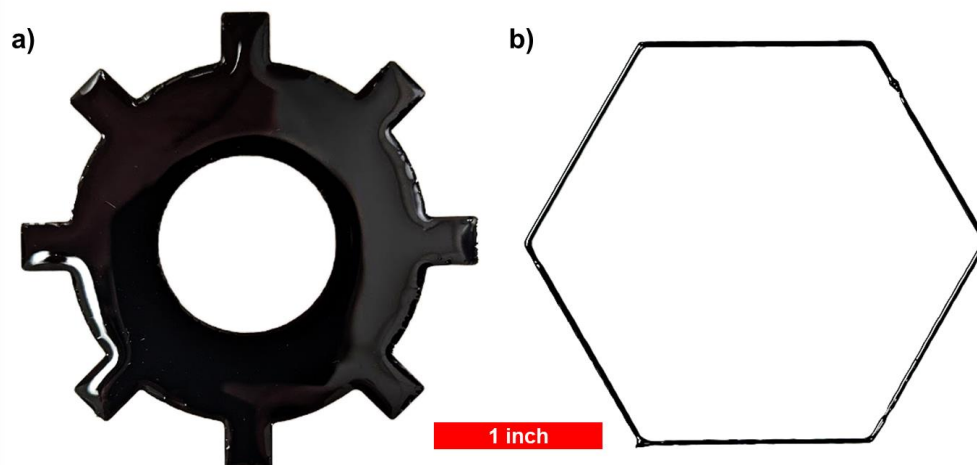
Complex shapes manufactured using direct-ink write printing and RF heating and curing: (a) A complex gear print, (b) single-trace hexagon.
